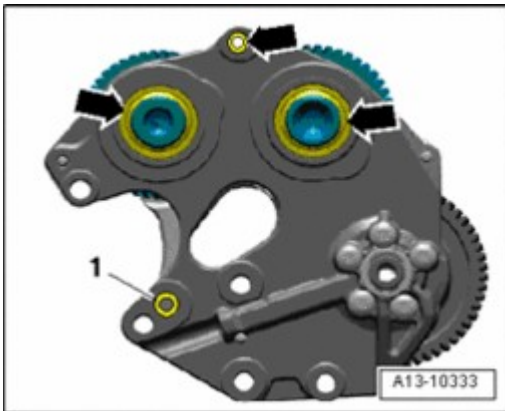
Applying Sealant Beads To Clean Sealing Surfaces Of Spur Gear Unit
